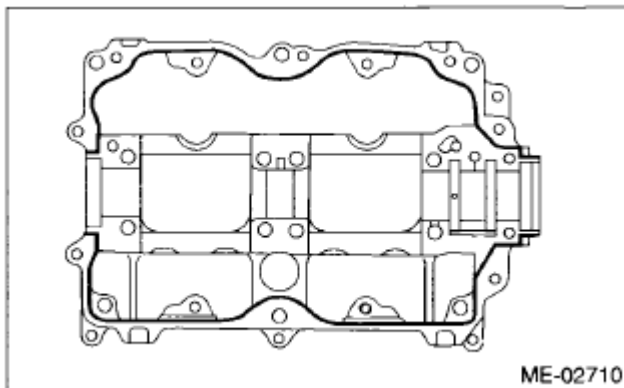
Identifying Liquid Gasket Applying Area On Mating Surfaces Of Camshaft Cap
